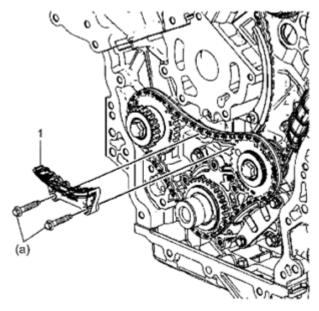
Identifying Timing Chain Lower Guide Courtesy of SUZUKI OF AMERICA CORP.
